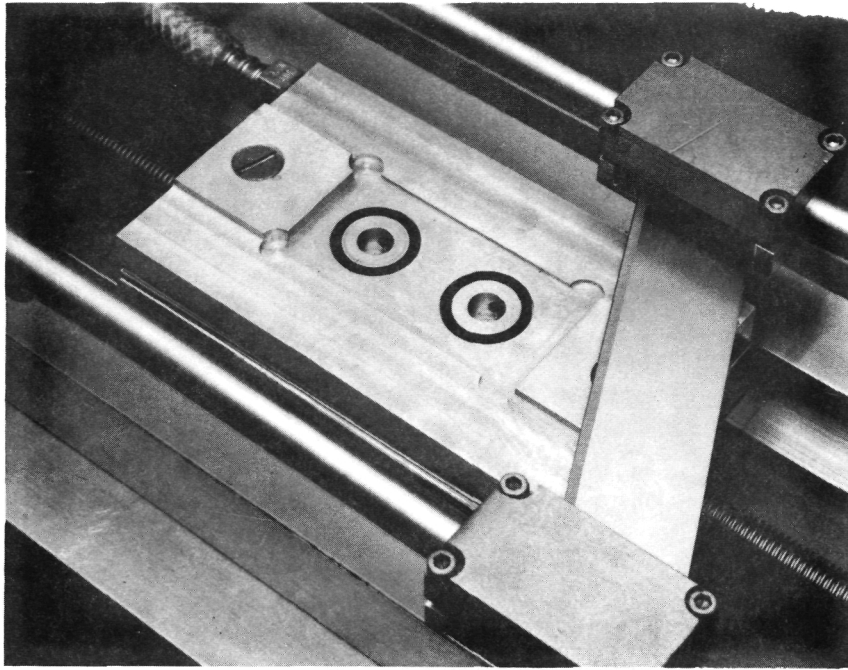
Close-Up View of Vacuum Chuck In Which Package Is Held During Delidding
